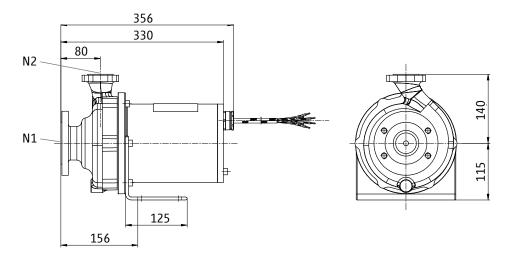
Dimensional drawing of LC32-125 with AGX1.8 motor from HERMETIC
